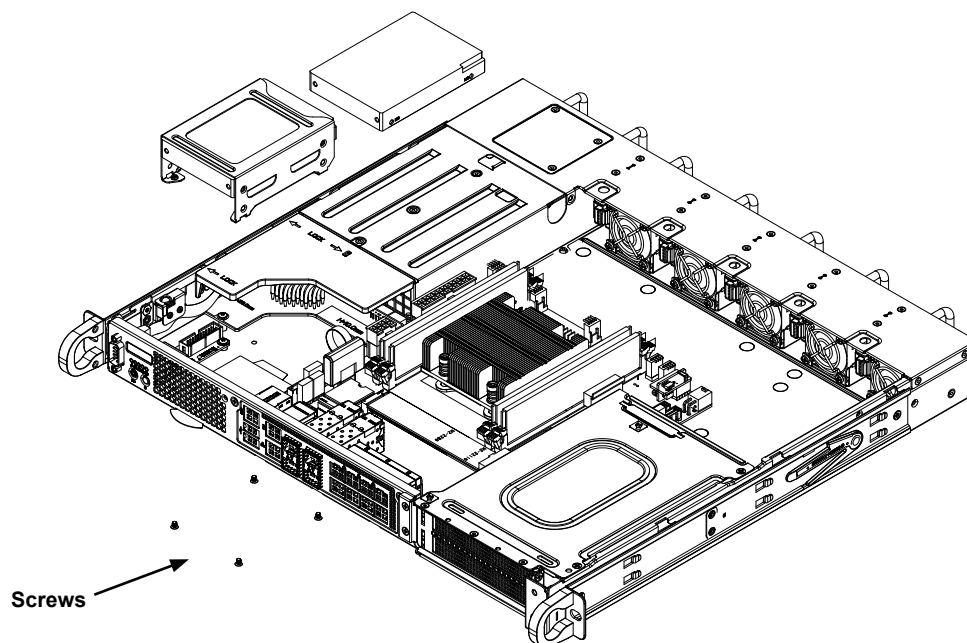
Securing the Solid-State Disk Drive to the Mounting Enclosure
